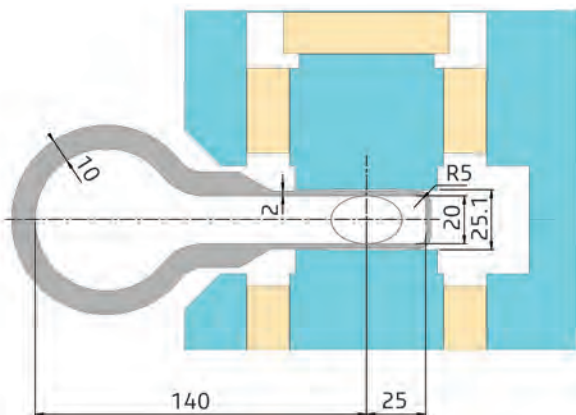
Insertion device chambers section – dimensions in mm. The beam stay clear ellipse is also shown.
